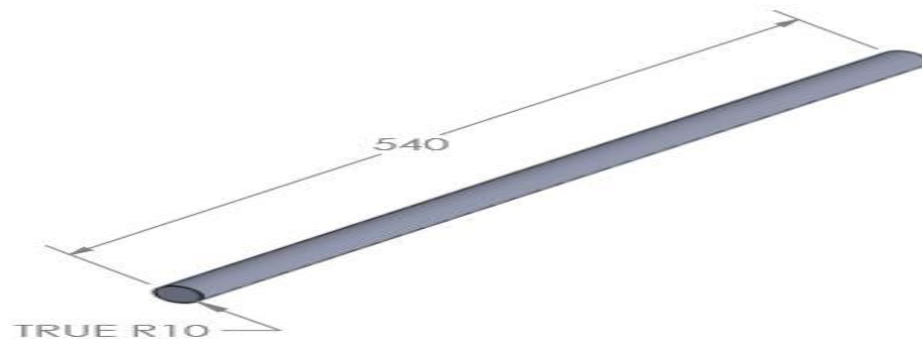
Drum shaft of the maize sheller prototype (dimensions in mm).
